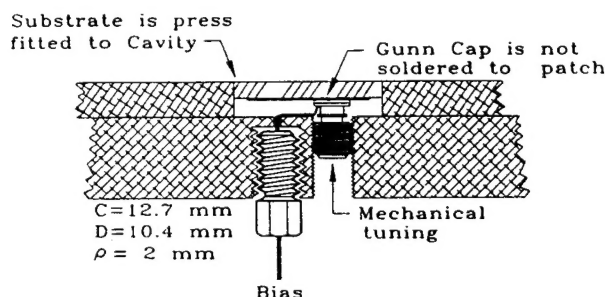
Gunn integrated ISA in adjustable test fixture.
